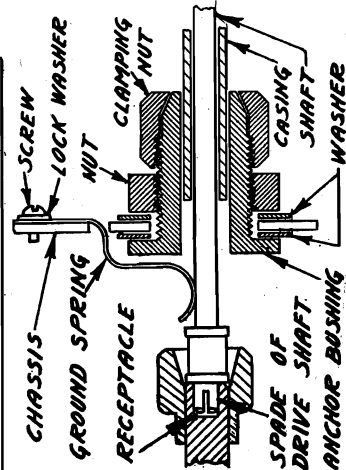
Details of Flexible Shaft Connection at the Chassis
